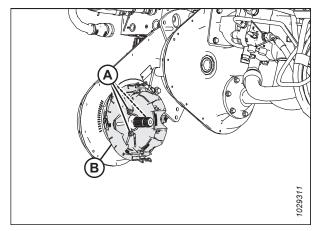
Completion Gearbox Chain Tensioner Cover
